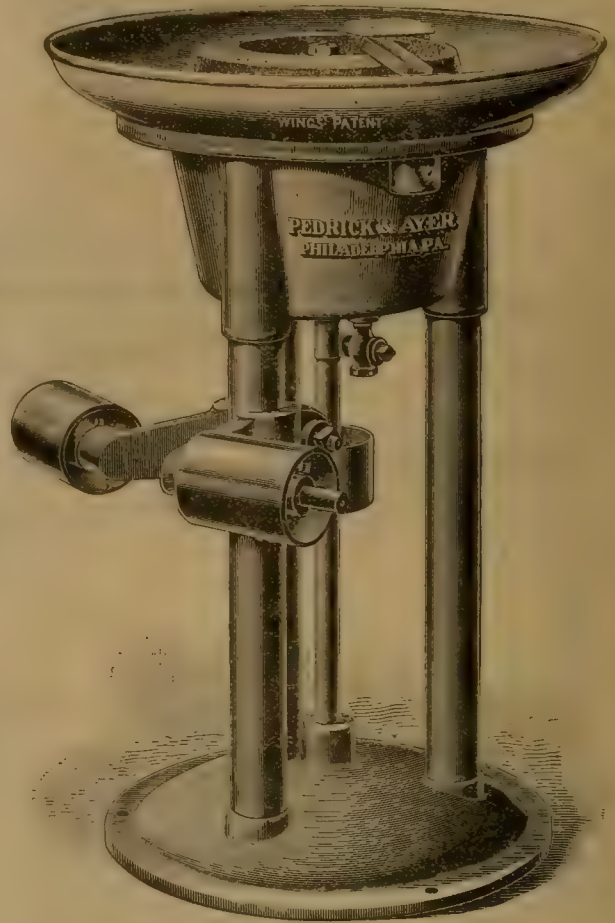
NO. 12 UPRIGHT GRINDER.
